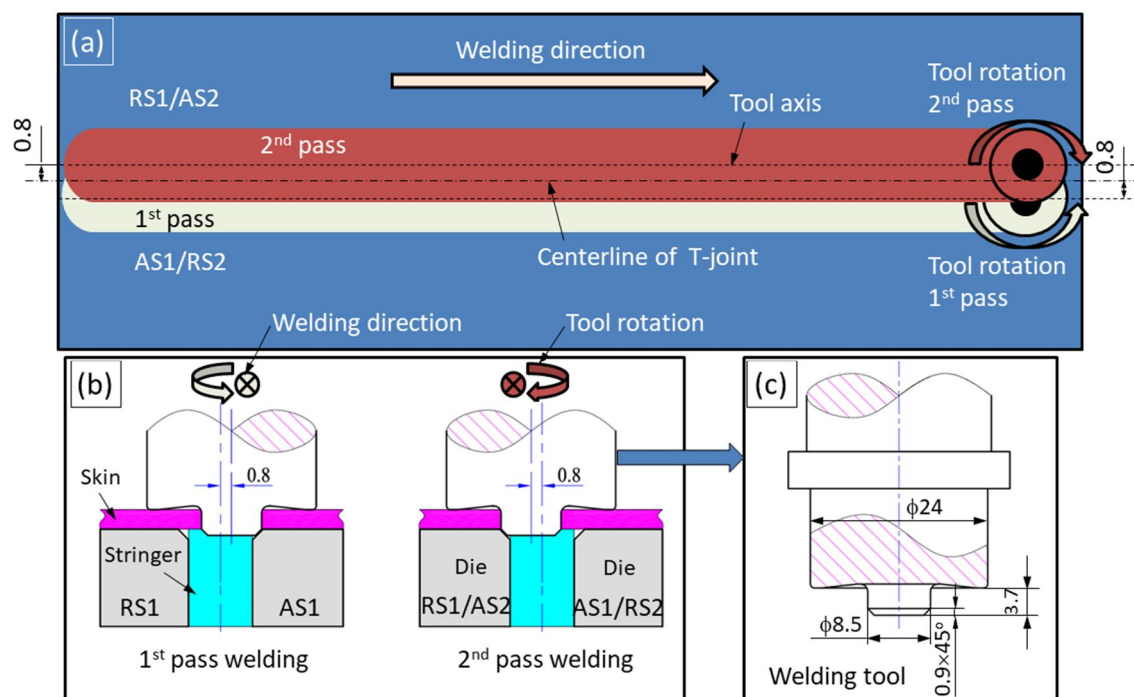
(a) Schematic diagrams of tool offset, (b) location of welding tool in reversed metal flow and (c) welding tool geometry (AS1, RS1 and AS2, RS2: advancing side and retreating side of first-pass and second-pass in double-pass welding, respectively).
